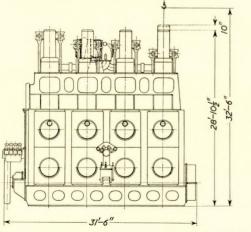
Mr. W. H. Purdie's 1944 machinery arrangement of 3,300 b.h.p. engine with Diesel and steam electric auxiliaries
